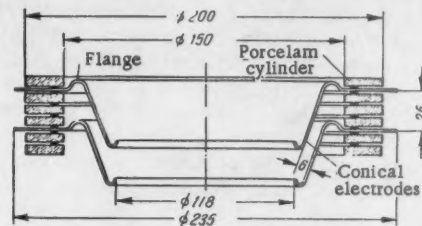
Shape of the tube electrodes (dimensions in mm).
